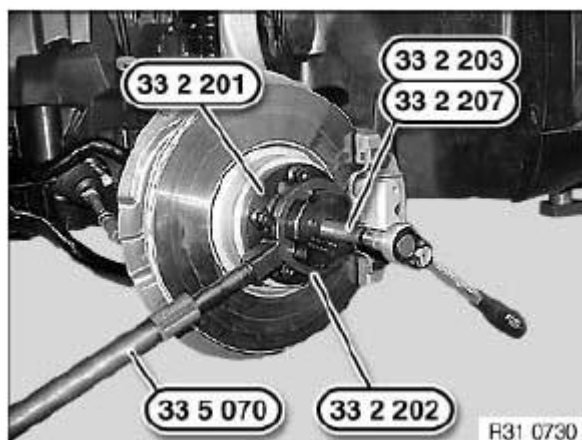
Identifying Special Tool (33 2 203), (33 2 207) And (33 2 201)
